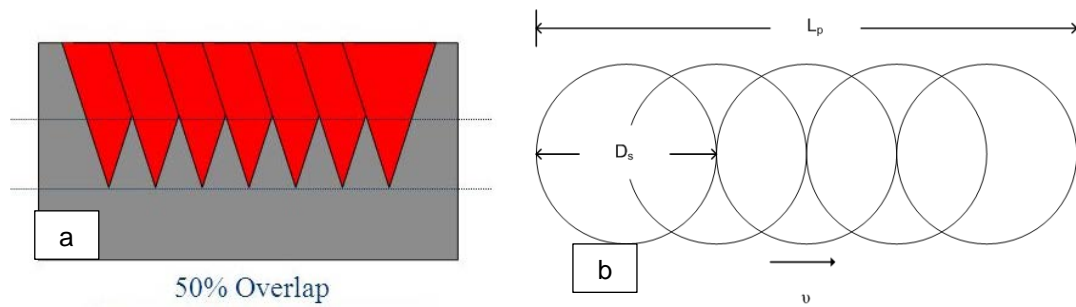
An example of 50% overlap in: a) seam welding, b) LST using a pulsed laser.
